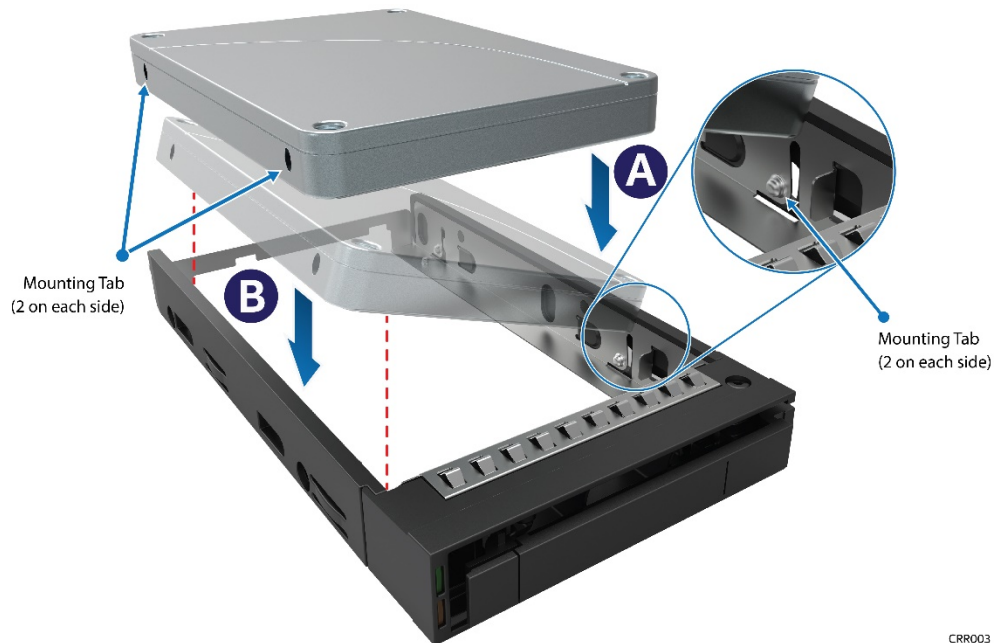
2.5" Drive Carrier Assembly – Drive / Drive Blank Removal
